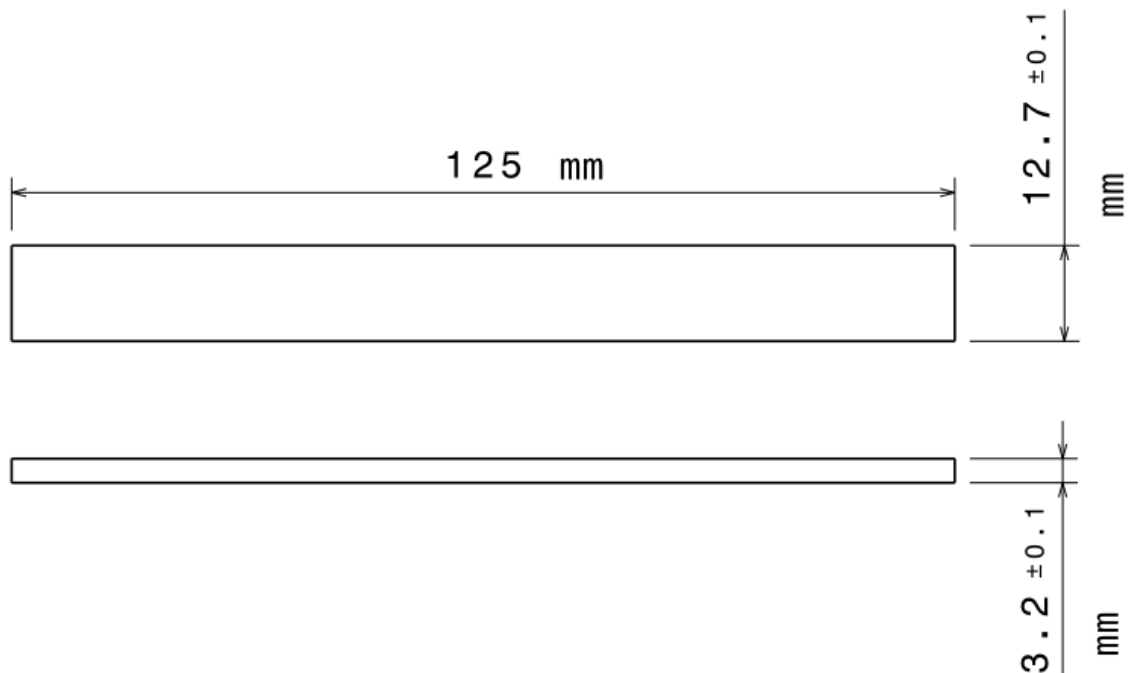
Dimension of ASTM D 790 Specimen for Three-point bending test
